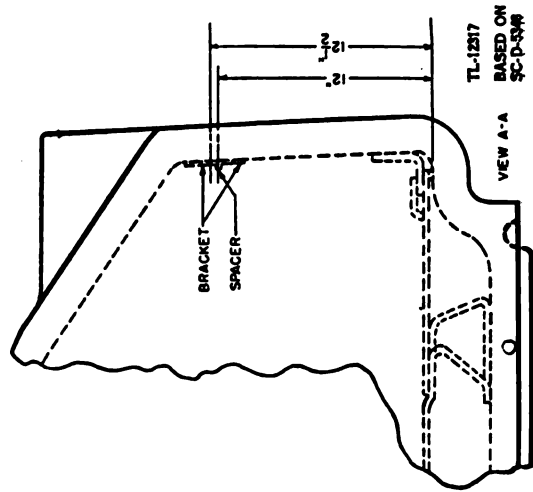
Installation and details of radio brackets in turret of Medium Tank M4 series.
